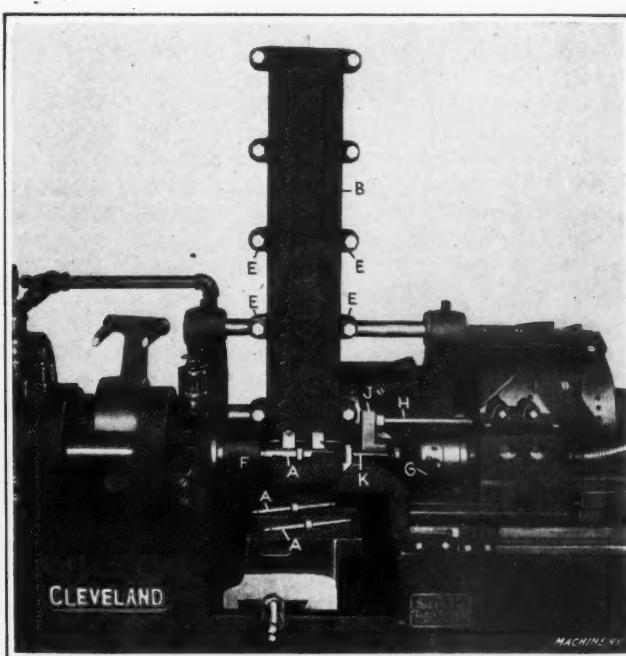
Seven-eighth-inch Automatic Screw Machine equipped with Magazine for feeding Double-ended Screws to the Chuck in which they are held while performing the Threading Operation
